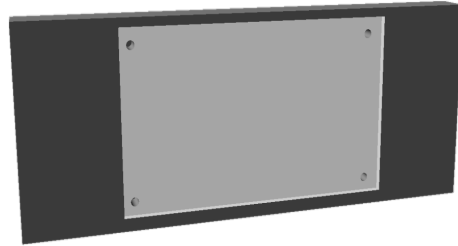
3D model of the PCB mount. The PCB will be screwed into the indent in the middle, and the mount will be taped along the edge of a slab.
